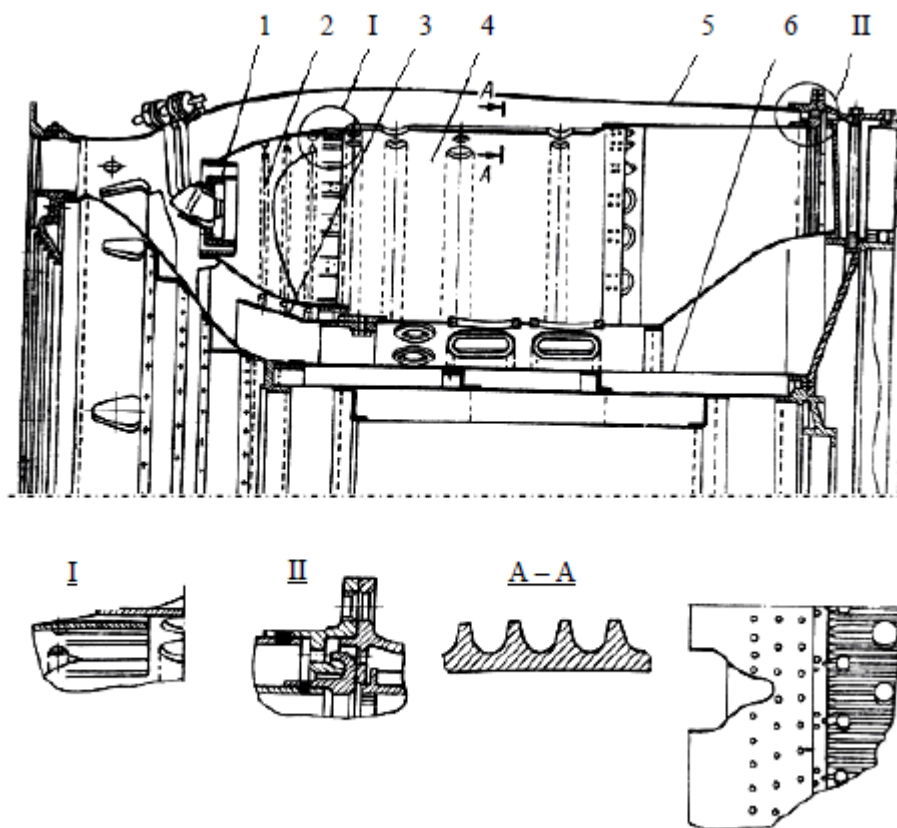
Annular combustion chamber: 1 - blade stabilizer; 2 - block of heads; 3 - deflector for leveling the air flow; 4 - fire tube; 5 - outer casing; 6 - inner casing
